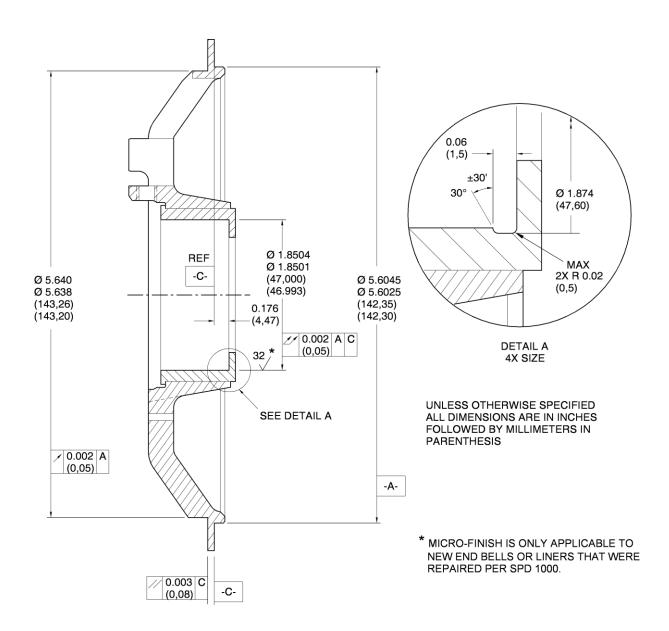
Drive End End Bell Bearing Liner Machining Specifications (Pre-Load)
